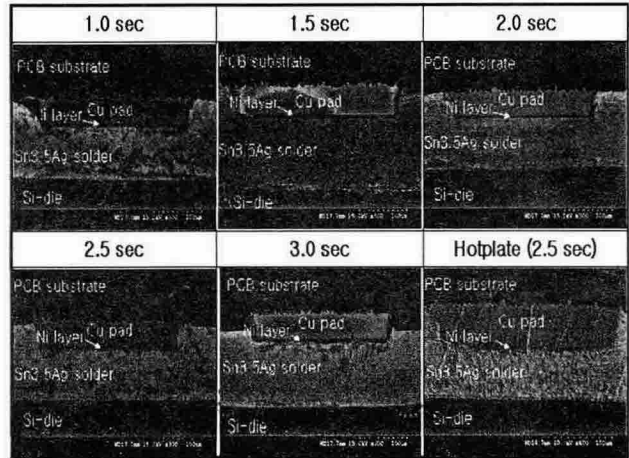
Solder joints by ultrasonic soldering at various soldering time
